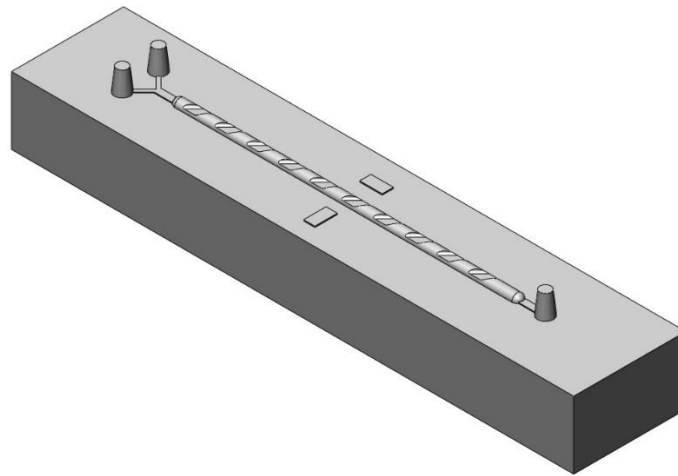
Example of a metal mold insert used in the molding manufacturing process.
